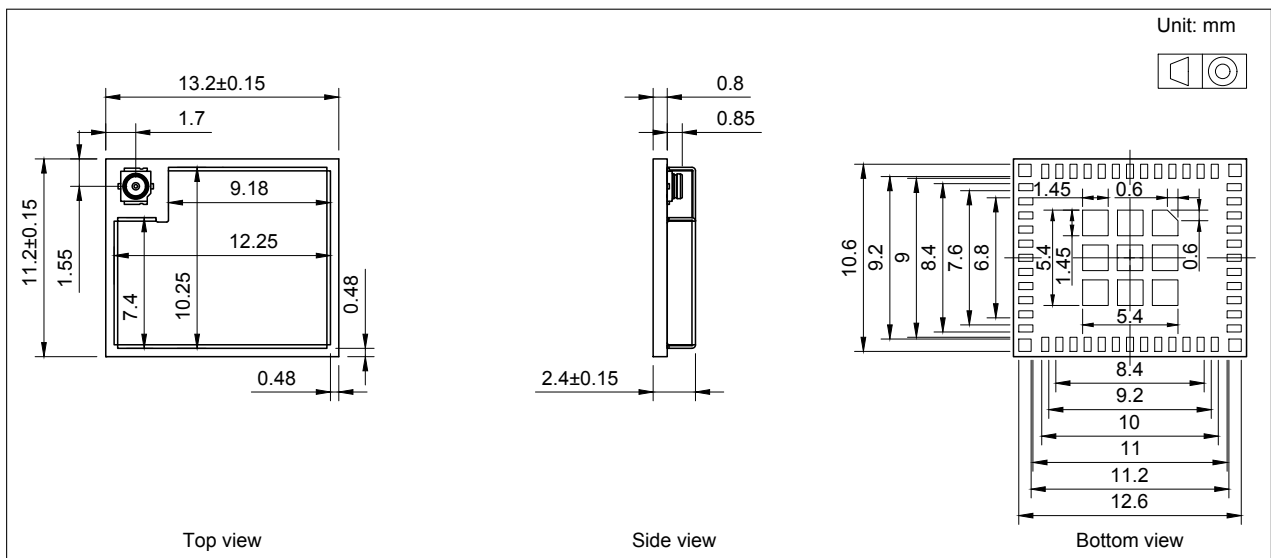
ESP32-PICO-MINI-02U Physical Dimensions
